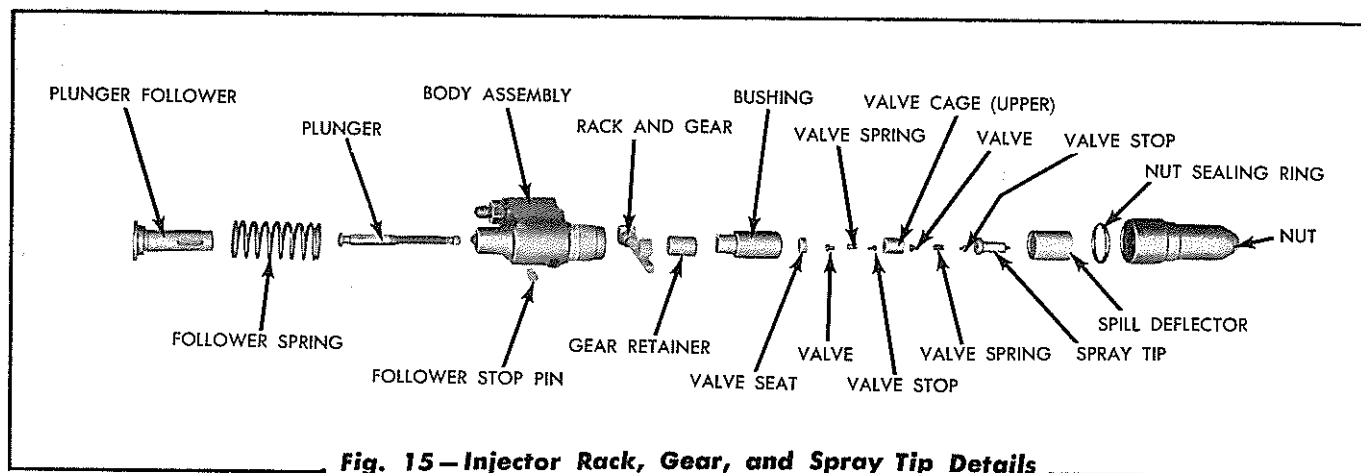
Injector Rack, Gear, and Spray Tip Details
